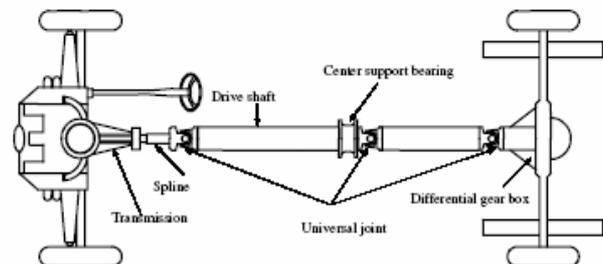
Conventional two-piece drive shaft arrangement for rear wheel vehicle driving system
